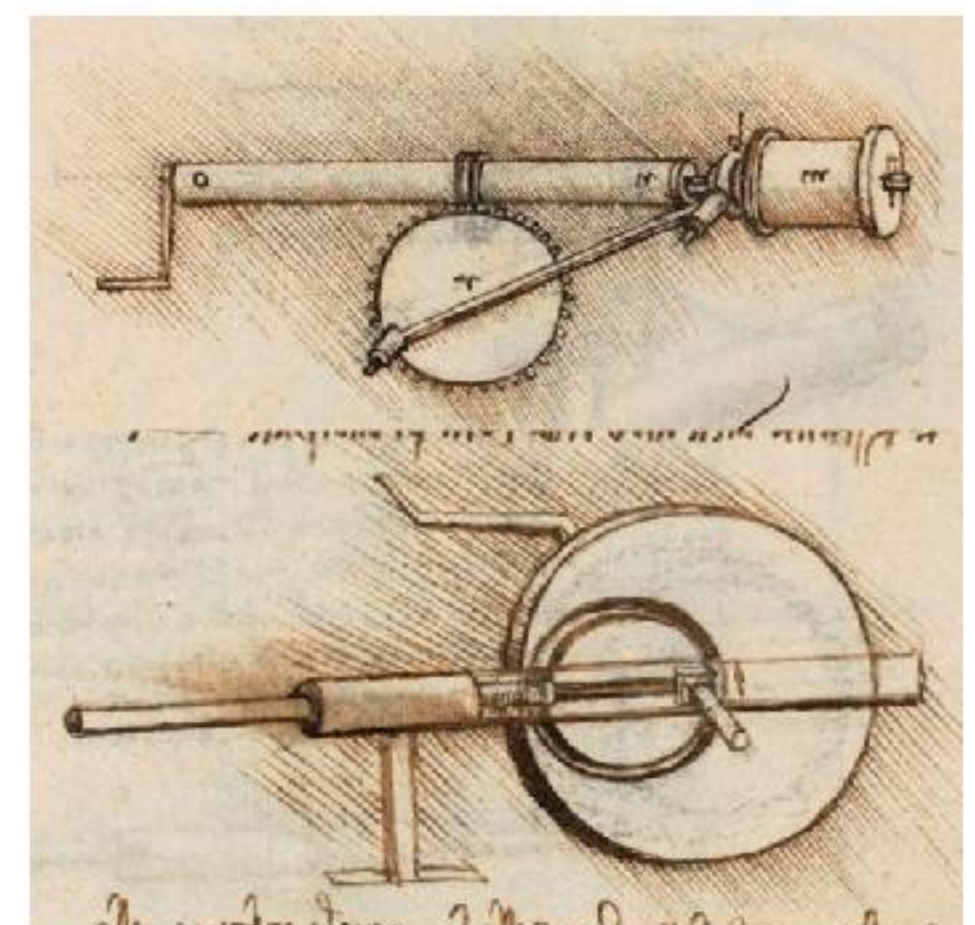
Two means of using rotary motion to slide a rod back and forth (à la Stanley). The upper drawing is a bobbin winder, and the spool turns as the rod slides.
